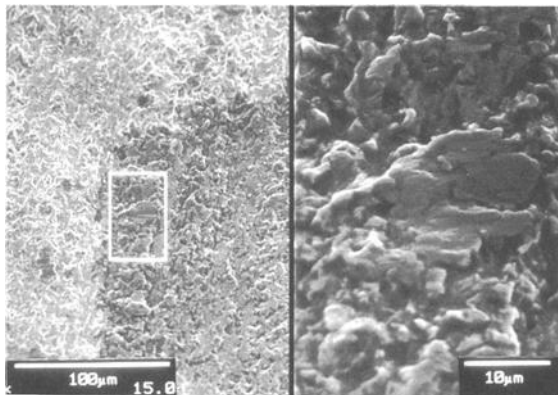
Ti-62222 fracture surface showing surface damage (175°C), $R = 0.1$.
